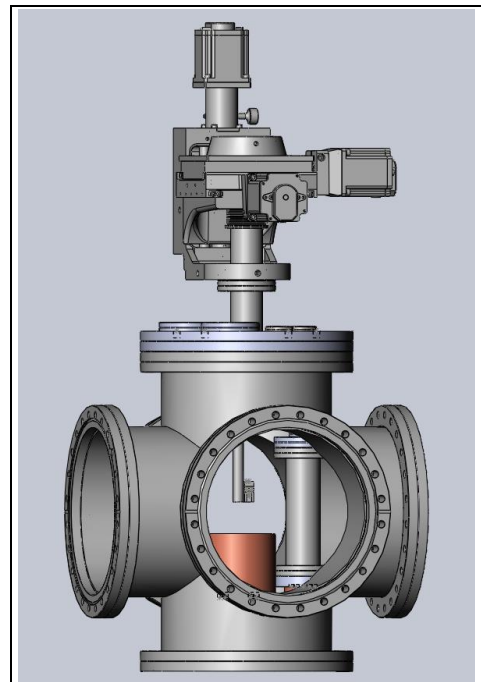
A CAD assembly of the test chamber for generating liquid sheets under roughing vacuum. A six-way 10'' stainless steel cross is used as the vacuum chamber. The stainless-steel lid with the mounted cold trap (depicted fully in Figure 2.10) is top atop the test chamber with the cold trap suspended from the lid. Atop the stainless-steel lid is the XYZ manipulator used to move the positive of the holder and chip. The chip is attached to an optics put which is mounted to a 2.75 in flange which is attached to the XYZ manipulator.
